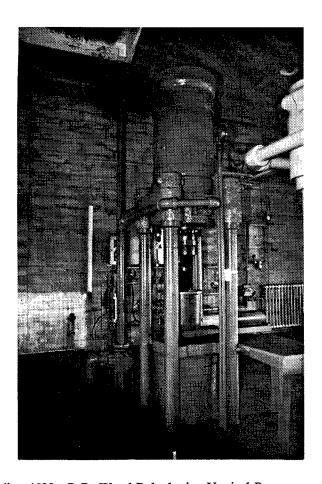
Building 4500: R.D. Wood Dehydration Vertical Press.
